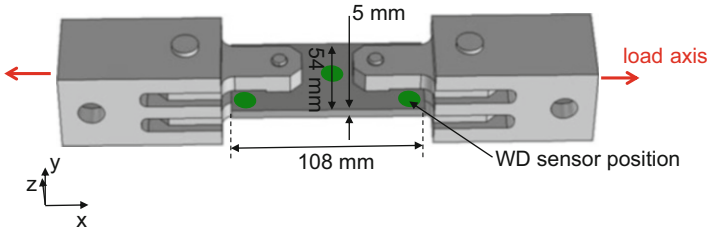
Test fixture for smallest specimen size used for bearing strength tests including AE sensor positions
